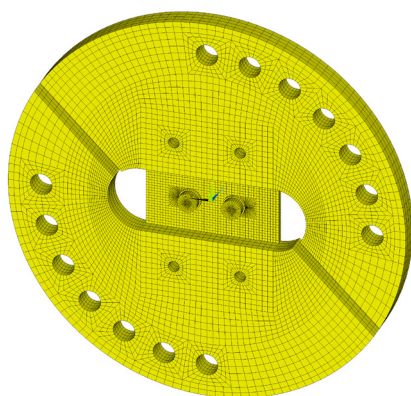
FE mesh of fixture, specimens and bolts (1/2 symmetry)
